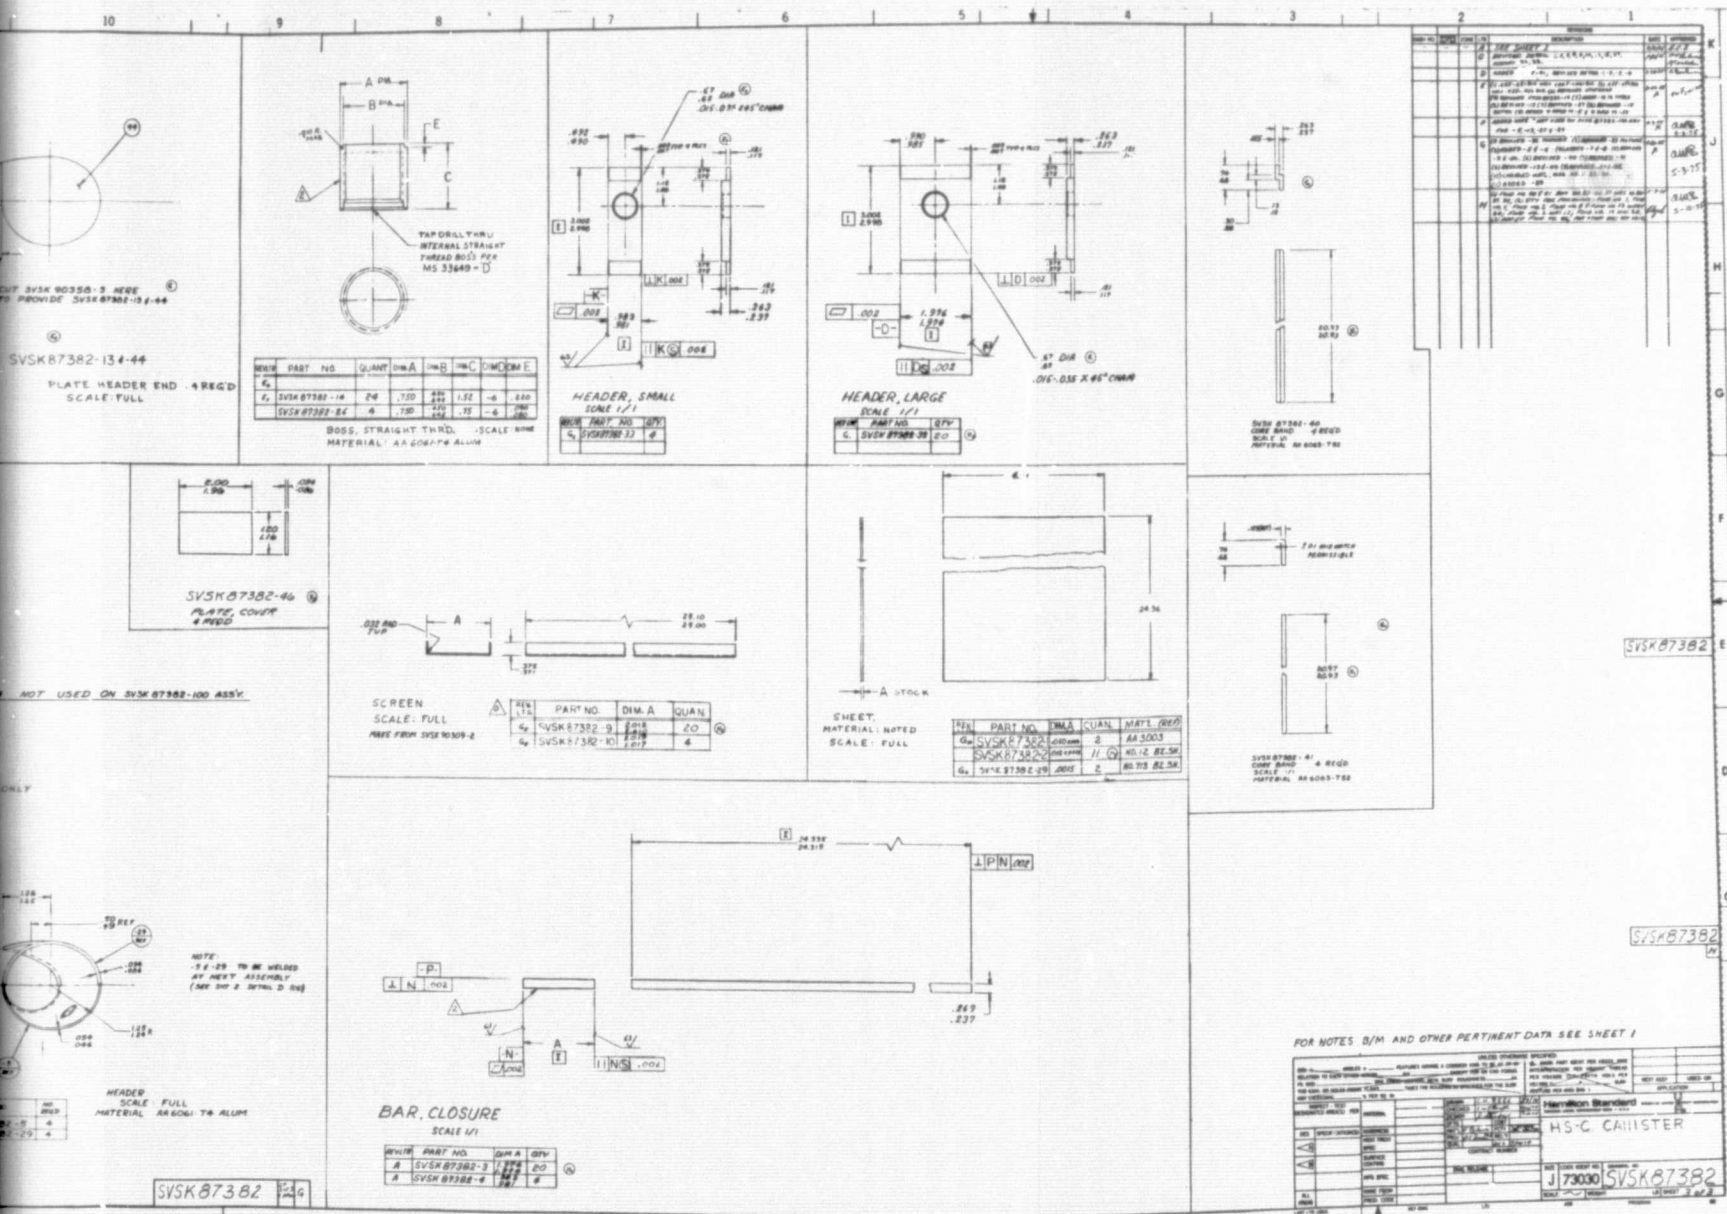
HS-C CANISTER DRAWING (SHEET 3)
